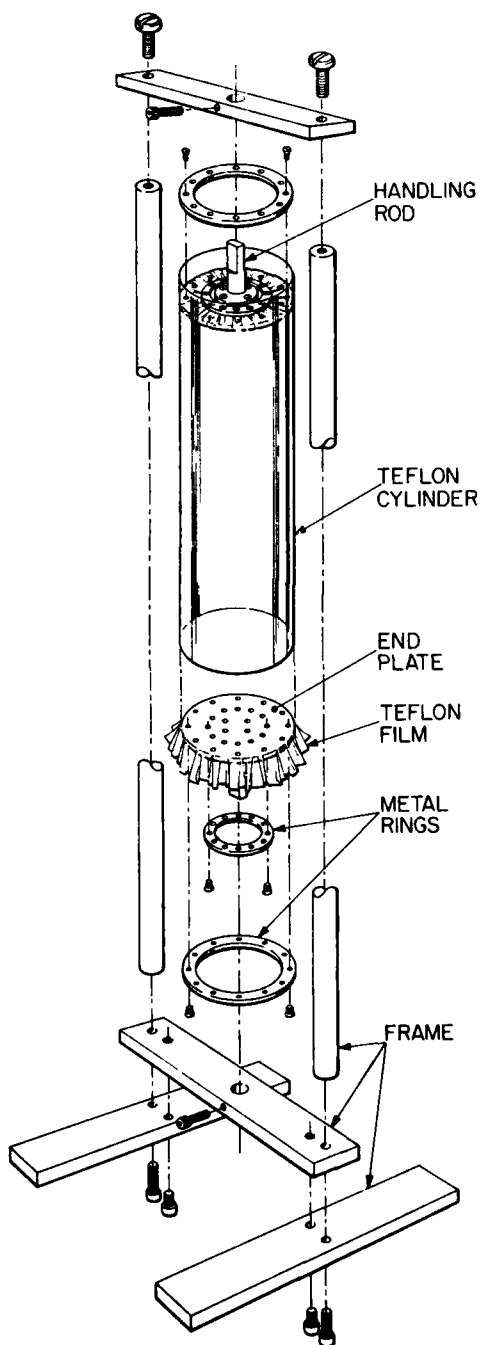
ASSEMBLY OF TEFLON FILM CELL.
